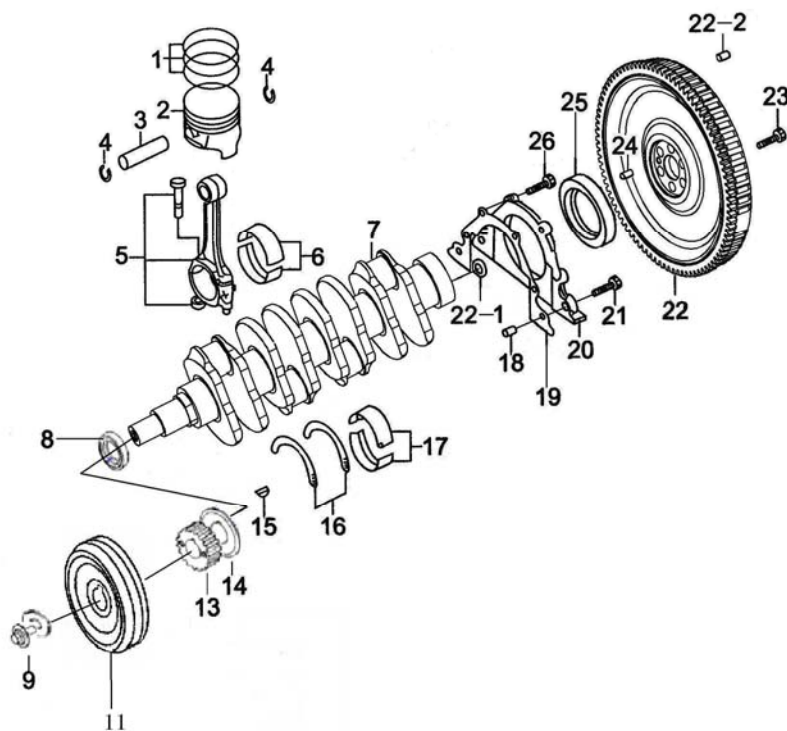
Piston, connecting rod, crankshaft and flywheel assembly
